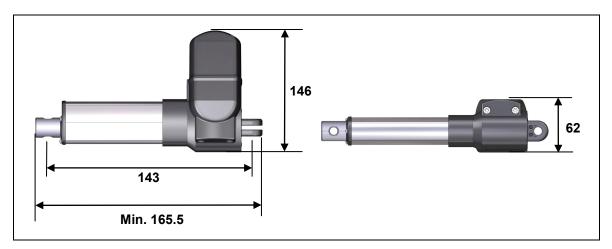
Dimensions of ALPHADRIVE drive stroke pipe without slot (in mm) Minimum installation dimension: 143 mm
